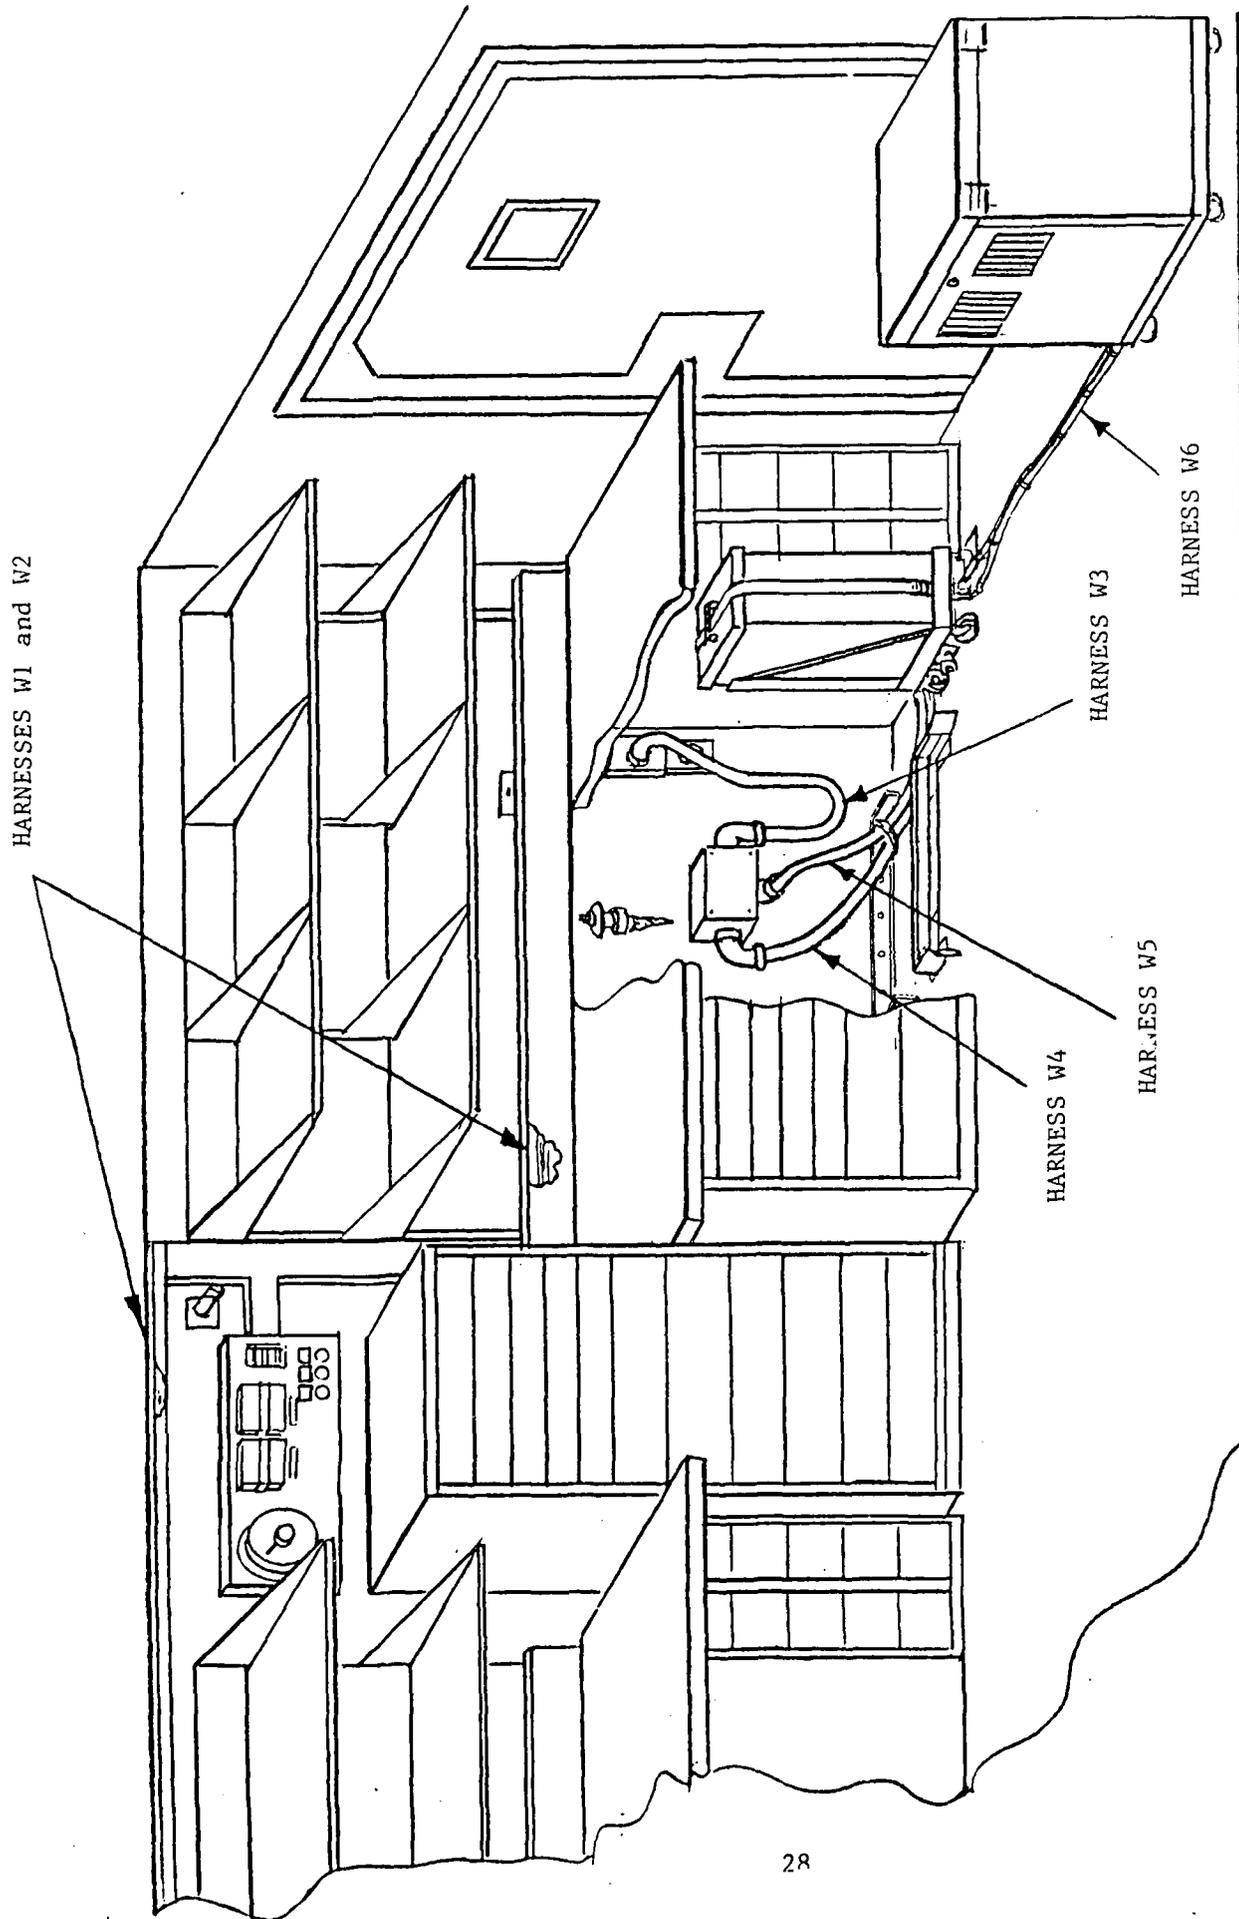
Wire Harness Routing - Mechanical Calibration Shelter
